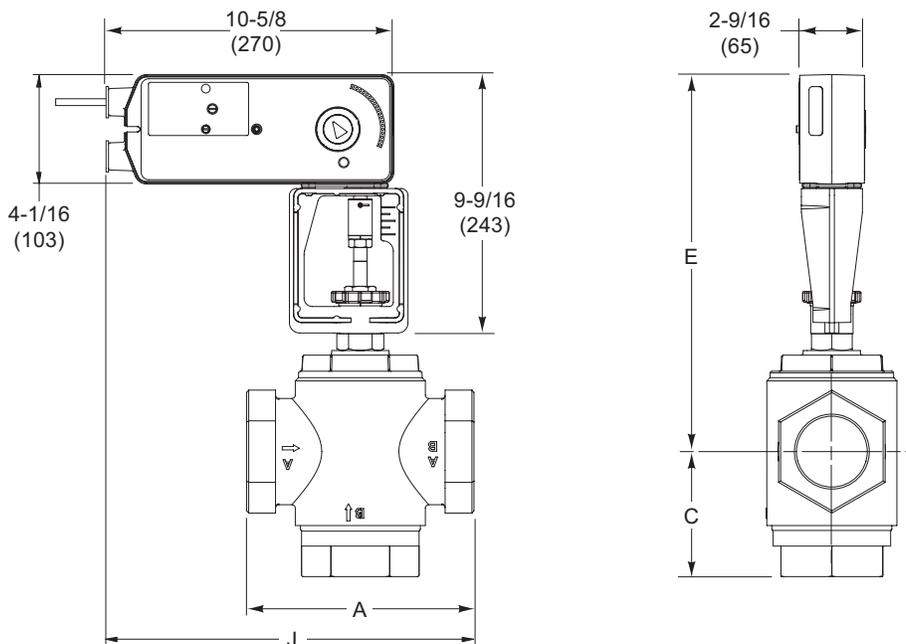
Mx61-720x with 2½" or 3" 3-Way Screwed Globe Valve.
